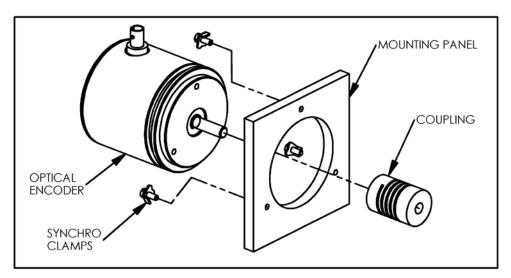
Shafted Encoder Mounting via Thru-Hole With Synchro Clamps
